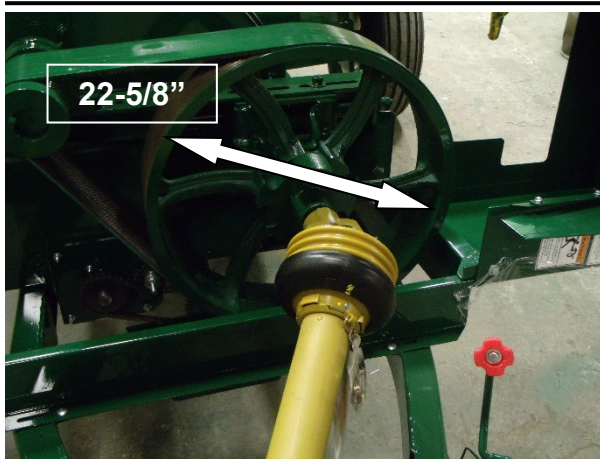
Large Pulley - 540 RPM (Shields Removed For Clarity).
